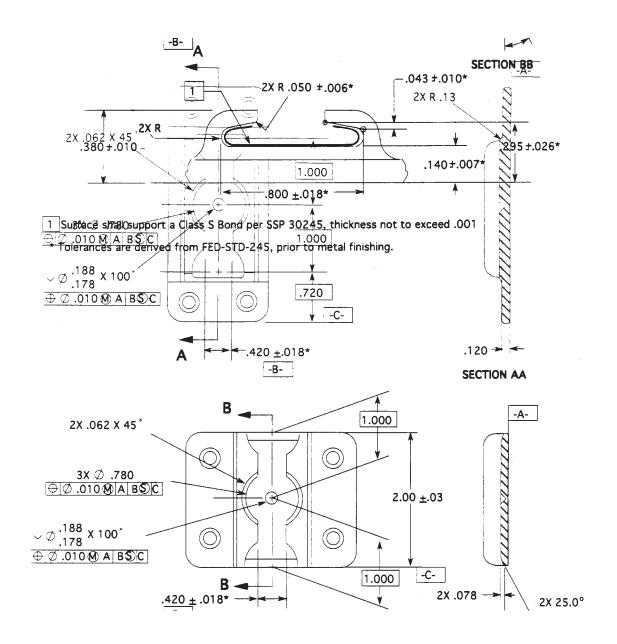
ON–ORBIT INSTALLED HANDRAIL BRACKET (SEAT TRACK) INTERFACE
